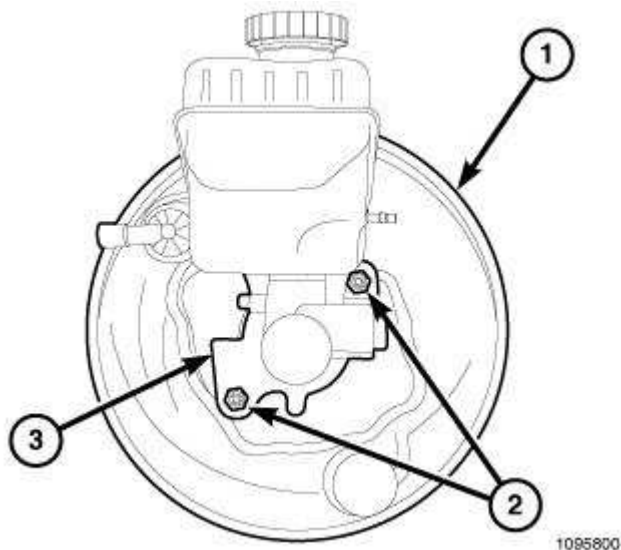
MASTER CYLINDER MOUNTING NUTS
